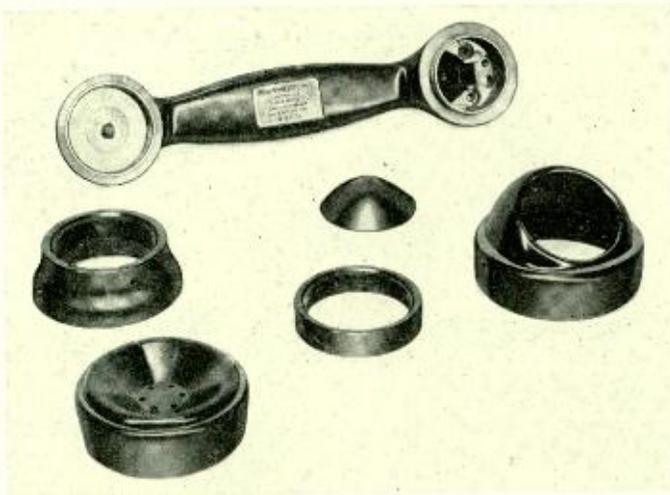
Familiar handset parts of phenol plastic. All except the handle have molded threads
